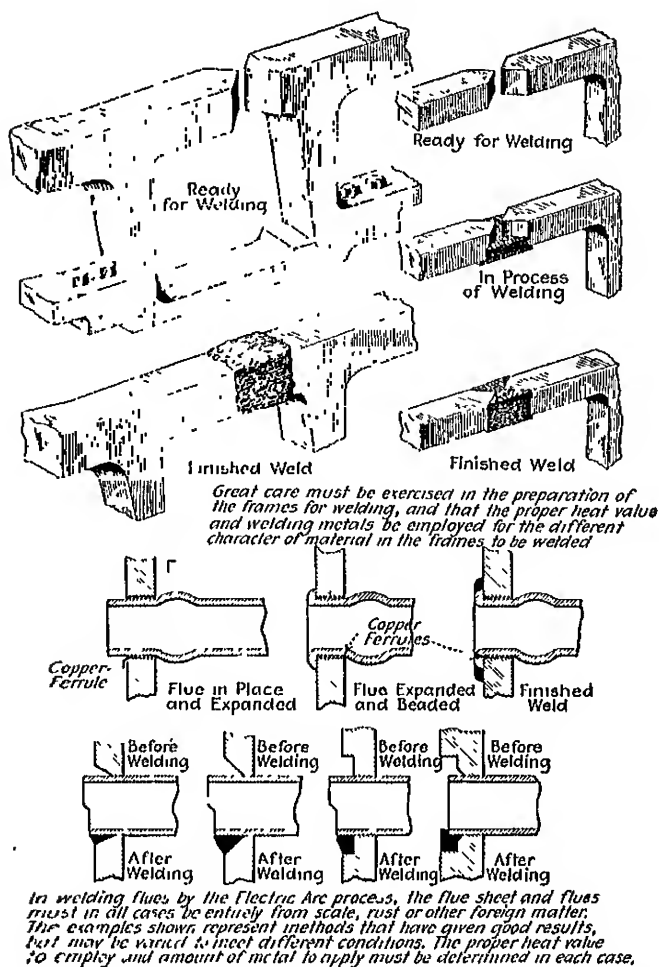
Examples of Electric Welding of Locomotive Frames and Boiler Tubes.
